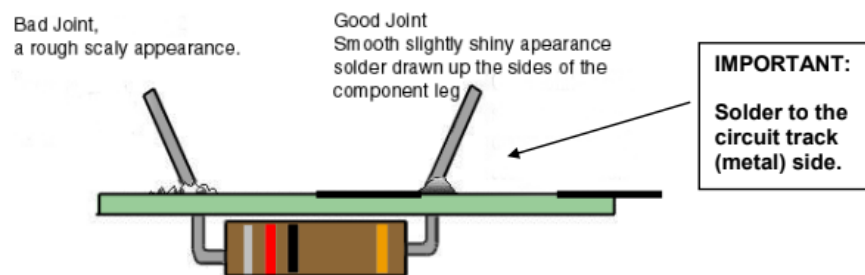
An example of good and bad solder joints, as seen from the side of a PCB.
